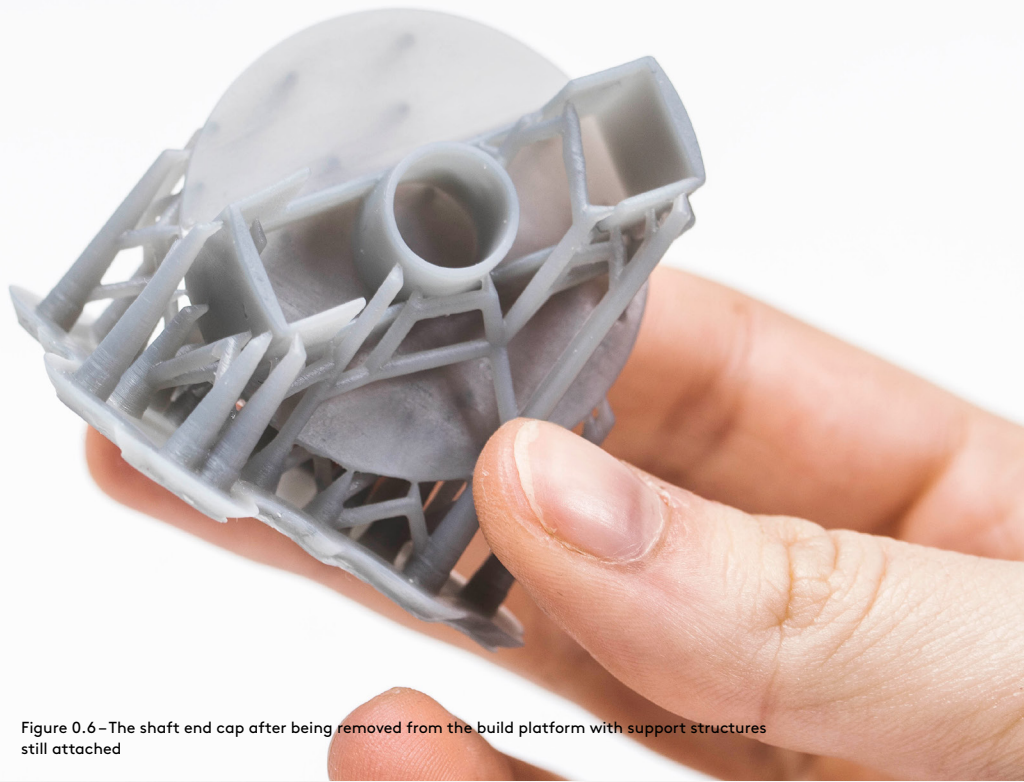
The shaft end cap after being removed from the build platform with support structures still attached
